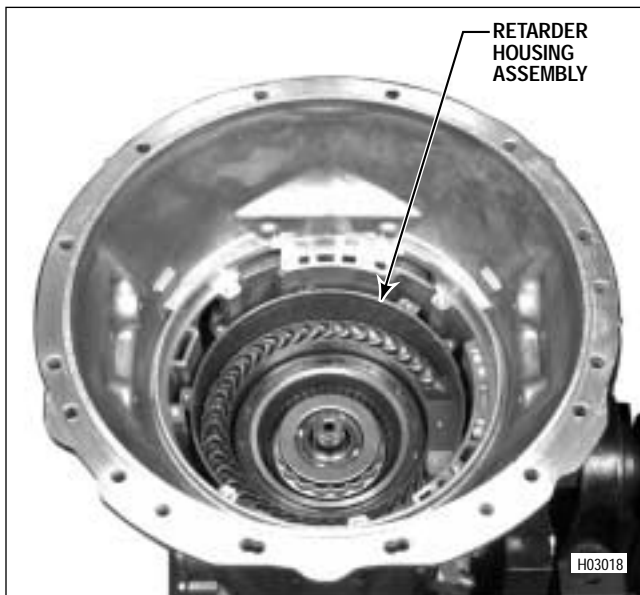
Removing Retarder Housing Assembly (Models With Retarder)
